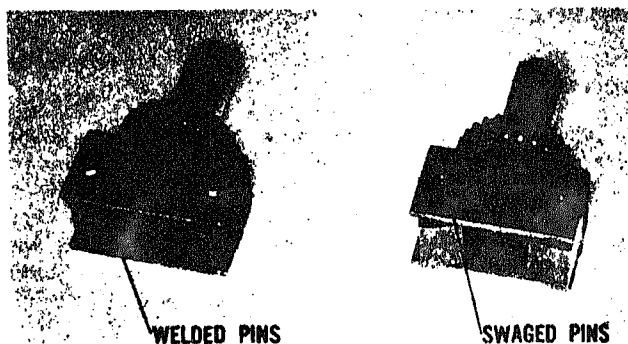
Welded and swaged governor carrier weight pins
